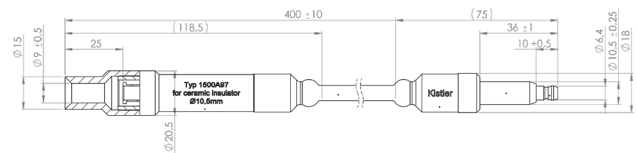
Ignition cable extension Type 1500A97 (Ø = 10,5 mm)
